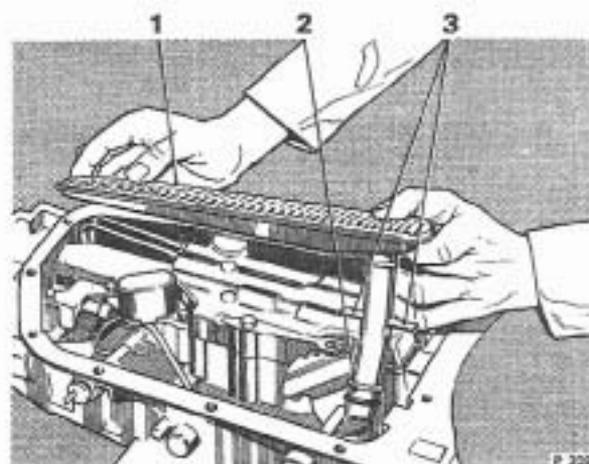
REMOVING INTAKE PIPE AND FILTER ASSEMBLY
